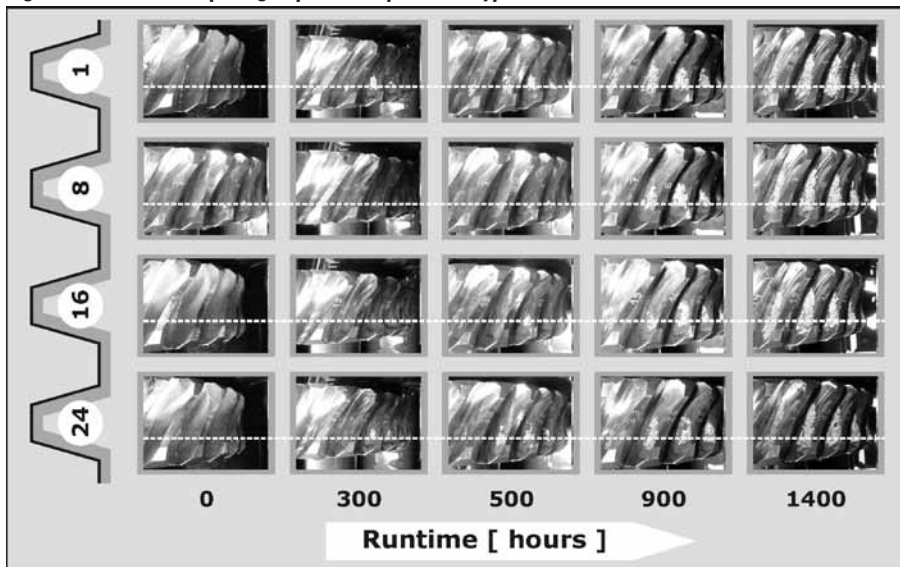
Pitting on test wheel: A=170 mm; Flank Type C, z₂/z₁=33/5 (Test 2, per Fig. 1).
